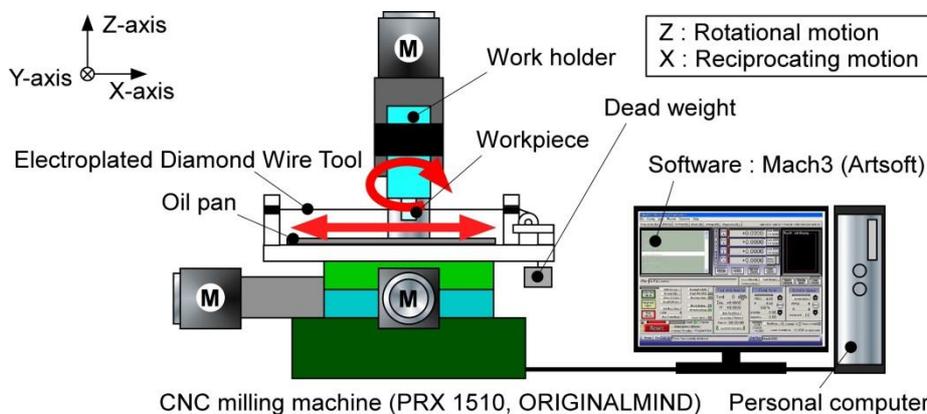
Schematic diagram of the experimental setup, which is a modified tabletop CNC milling machine
